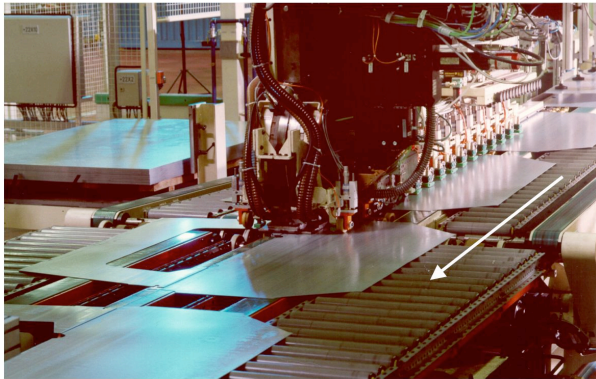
Fixed-optics welding machine with continuous material feed (arrow = feed direction).
